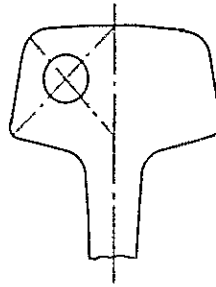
Position from which specimen for tension test of rail shall be taken.
